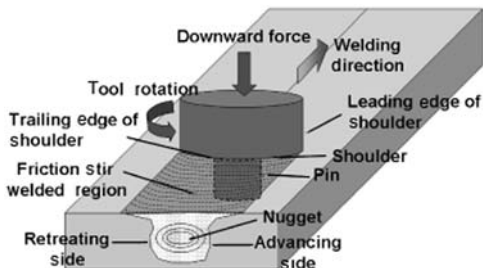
Friction stir welding process. Source: Ref 14
